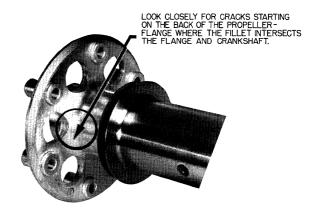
Rear View of Propeller Mounting Flange Showing Area of Lightening Holes.
